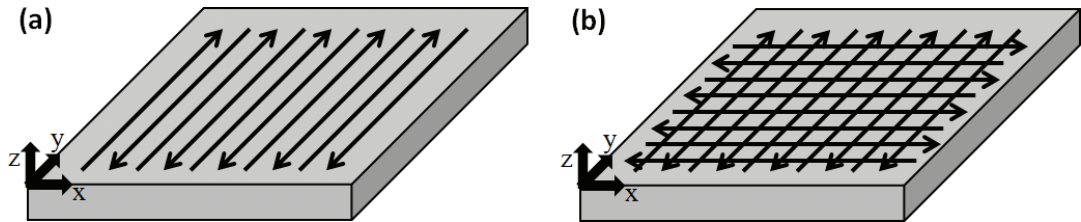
Sketch of the laser passes: (a) parallel stacking and (b) cross stacking.
